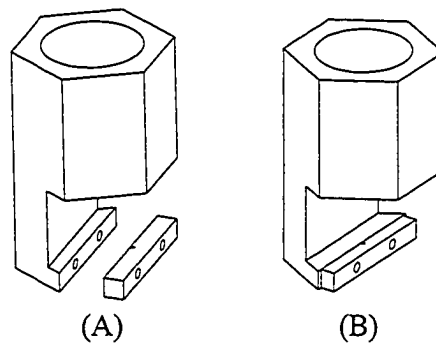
Brass clamps used to secure the specimen to the torsional adapter. (a) disassembled view, (b) assembled view
